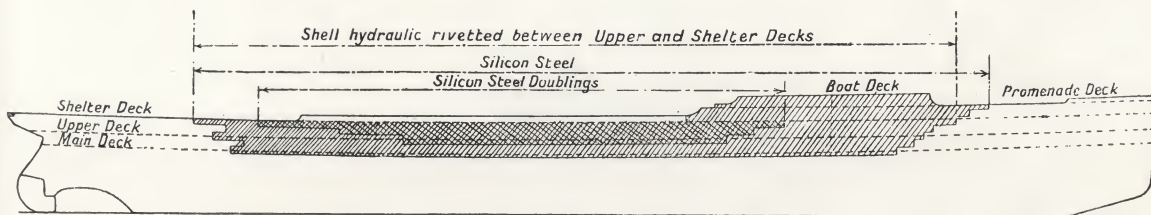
Profile showing extent of High-Tensile Steel and Hydraulic Riveting of Topsides.
